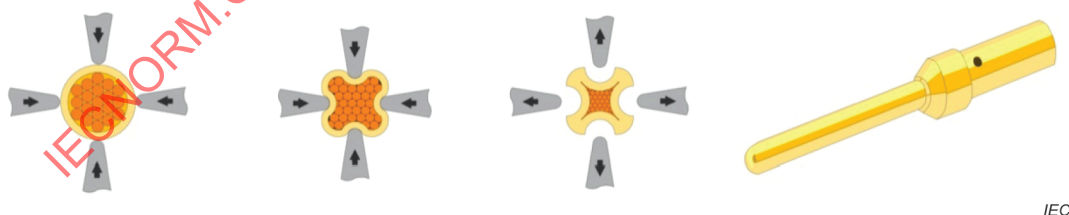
Crimping process of 4-indent crimping with adjustable tools
